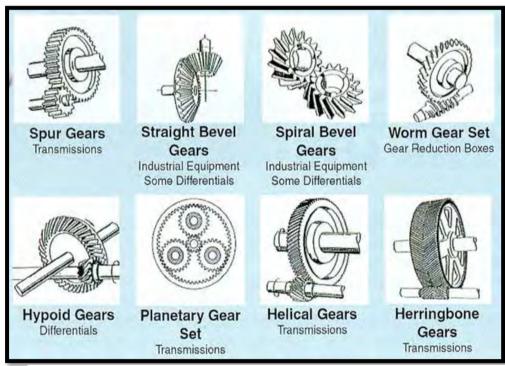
Example type of gears. Source: www.mh.mechanicalengineering.com
